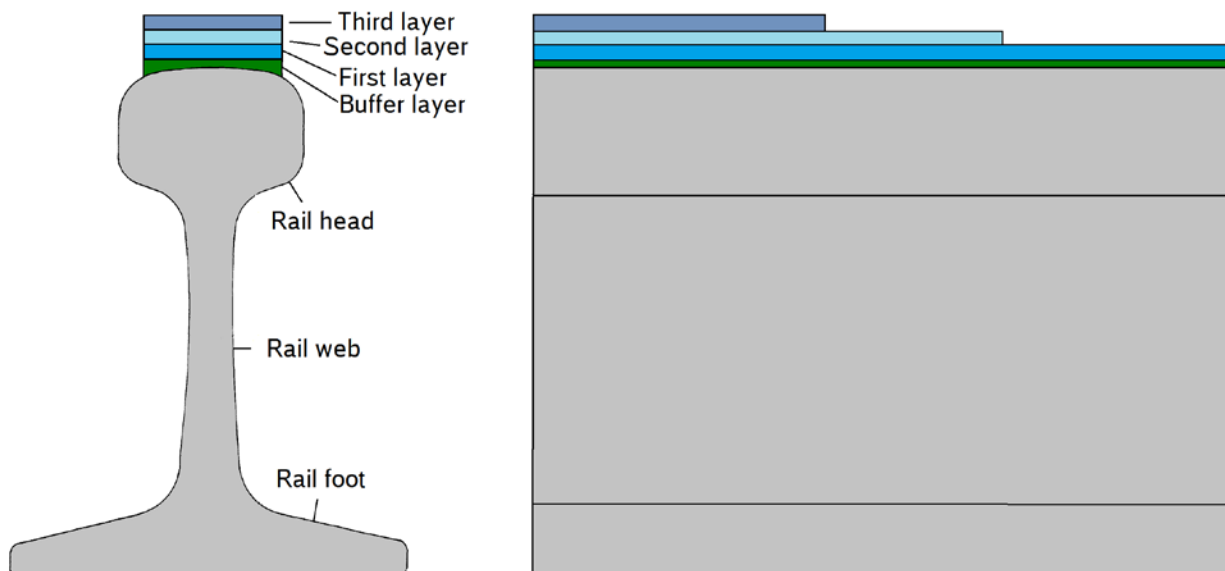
Test specimen for the material examination of welding filler metals
